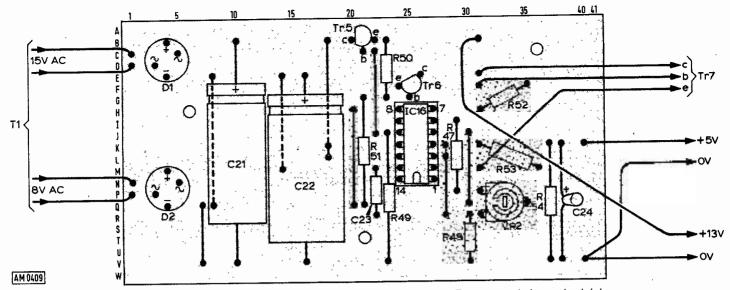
Component layout on the power supply board. Transistor Tr7 is mounted on a heatsink.
